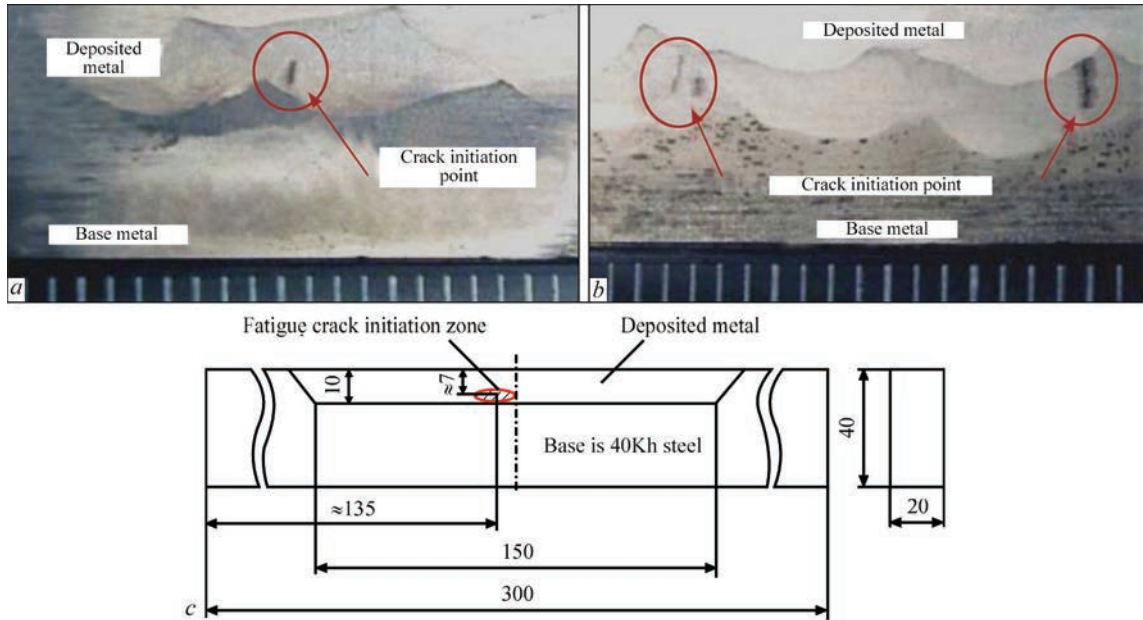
Points of fatigue crack initiation in specimens deposited without the sublayer (a, b), schematic image of their arrangement in the surfaced specimen (c)
